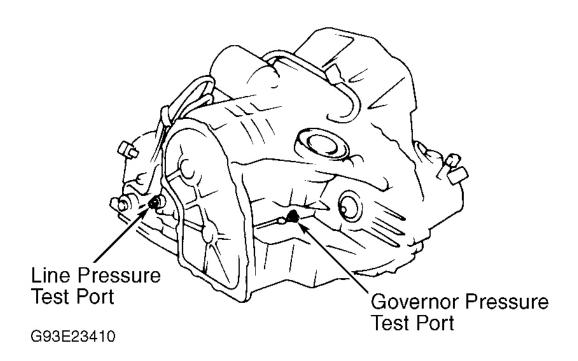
Identifying Hydraulic Pressure Test Ports Courtesy of NISSAN MOTOR CO., U.S.A.
